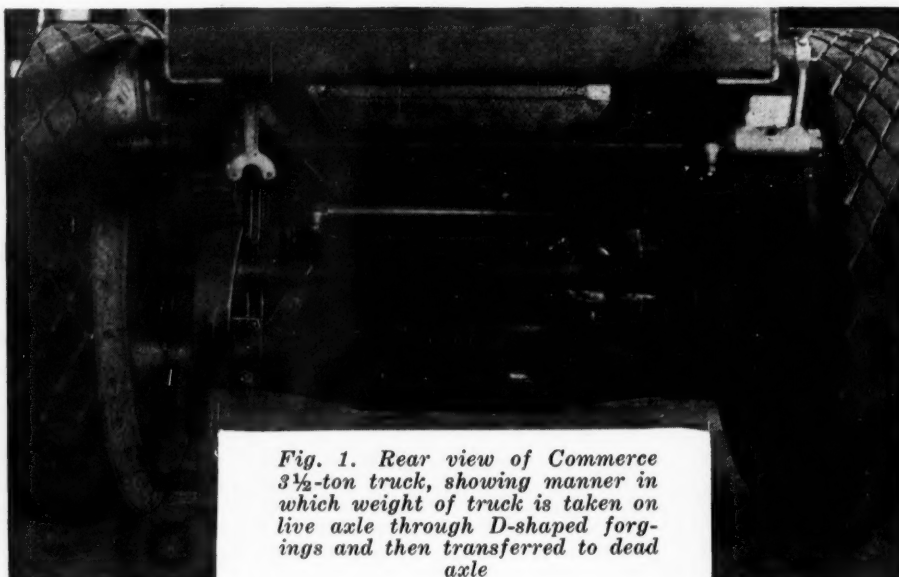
Rear view of Commerce 3½-ton truck, showing manner in which weight of truck is taken on live axle through D-shaped forgings and then transferred to dead axle
